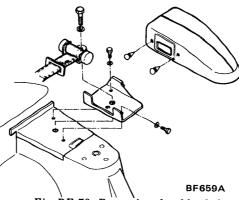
Removing shoulder belt (for S30 2 seater models)
